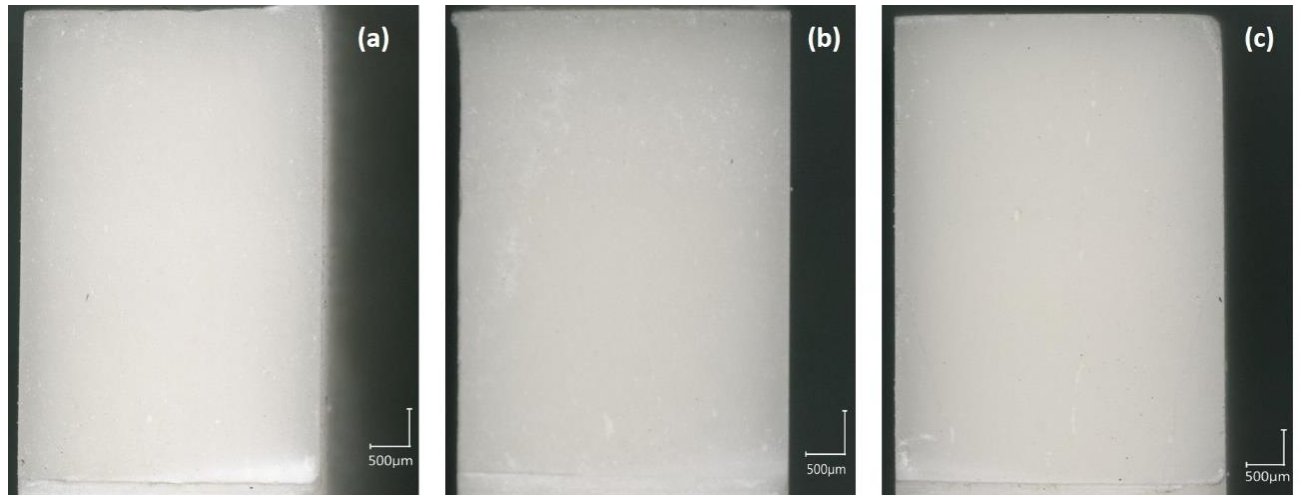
Figure 6. Fracture surface of 3-point bending specimens in XYZ (a), YZX (b), and ZXY (c) direction [112].
